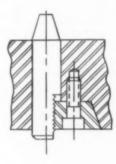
Serrated core shank and serrated wedge. Height adjustment by increments of serration.
